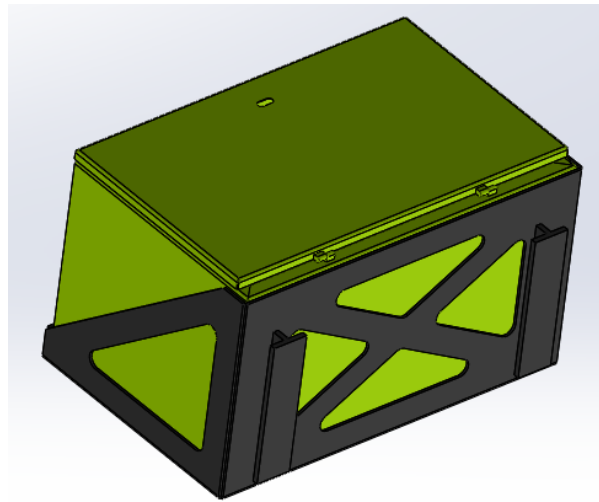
Battery box showing welded aluminium 'T' extrudes
